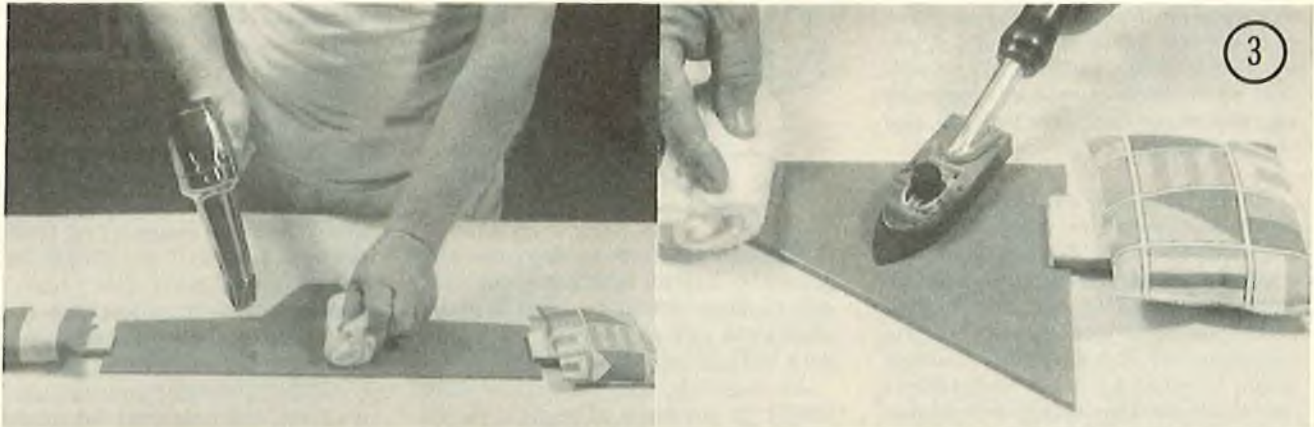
When using the heat gun to shrink MonoKote, etc., it drives us nuts when, as we rub, the piece slides back and forth on the workbench. We finally licked that "bug a boo." After the piece is covered and pin holes punched in one end to let out the air, we overlap the ends of the piece with
